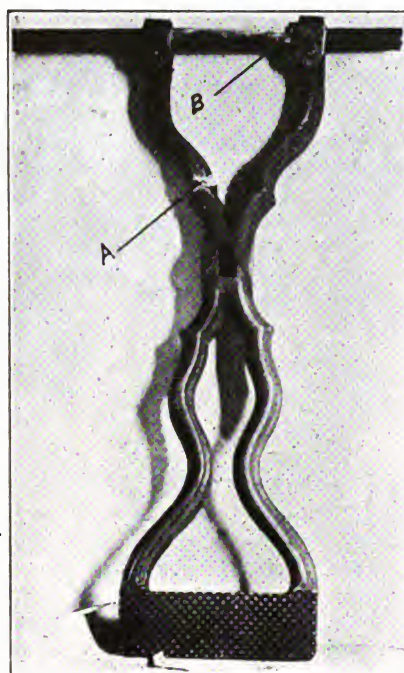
HOW THE PARTS WERE HELD IN ALIGNMENT WHILE WELDING
